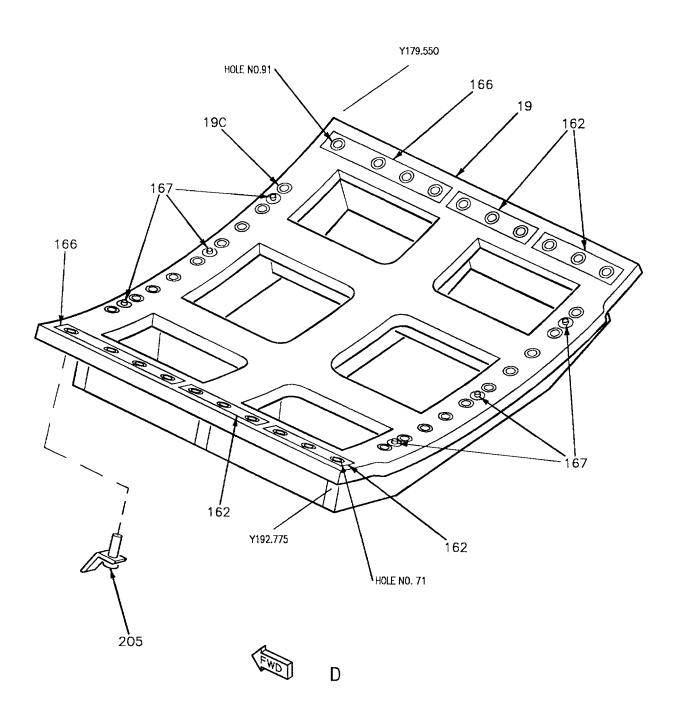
Inspection or Replacement - 74A313188 Former (Sheet 4)
